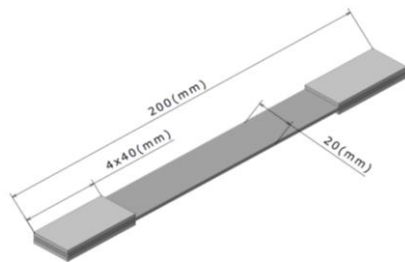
FML tensile test sample dimensions according to ASTM D3039 standard
